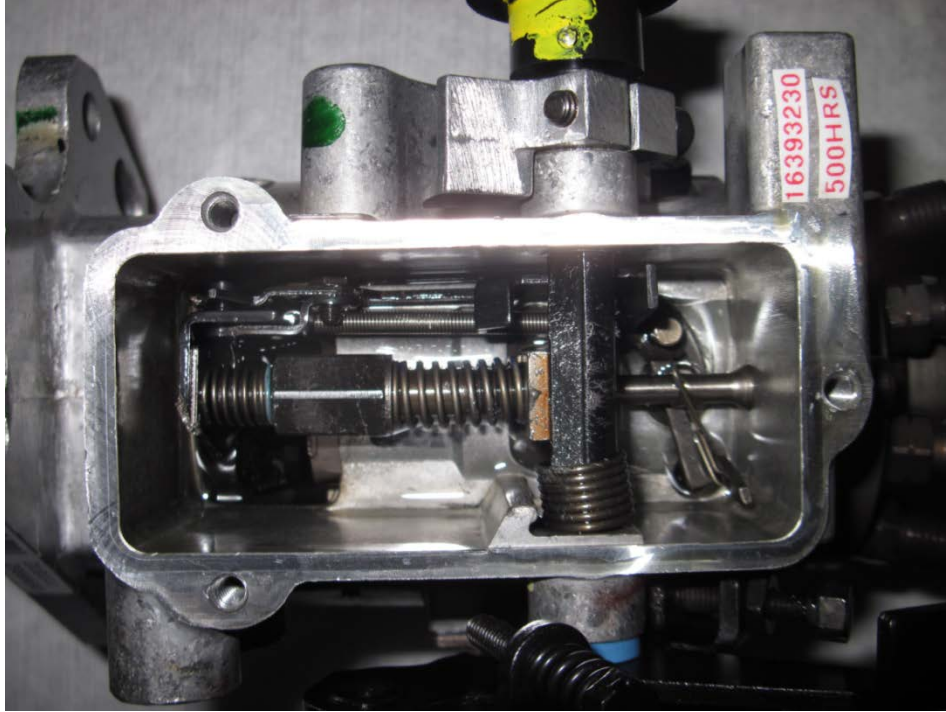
Pump SN: 16393230 Governor Assembly with 500-Hours Testing with ATJ/JP-8 Fuel
